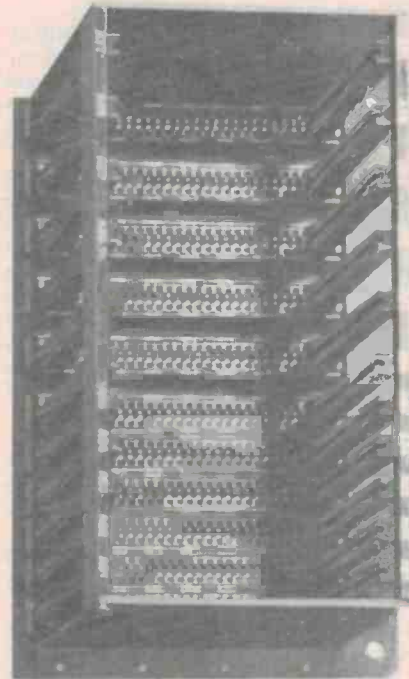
A typical rack assembly. Printed circuit boards can be slid in or put on the rack to maximise ease of servicing.
